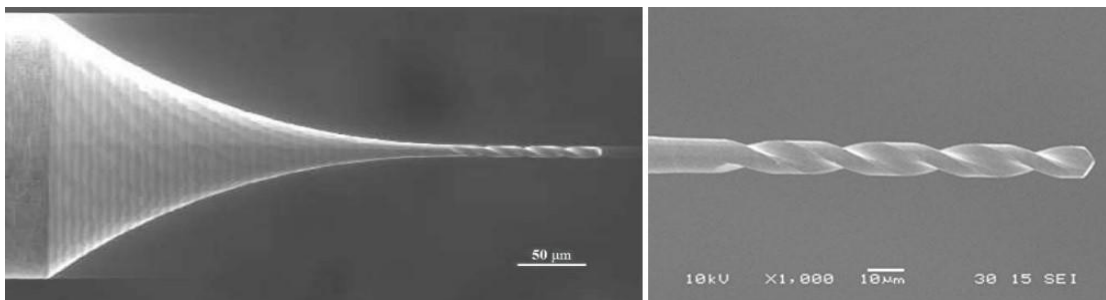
Twist drill type [15] d=0.01mm WC
